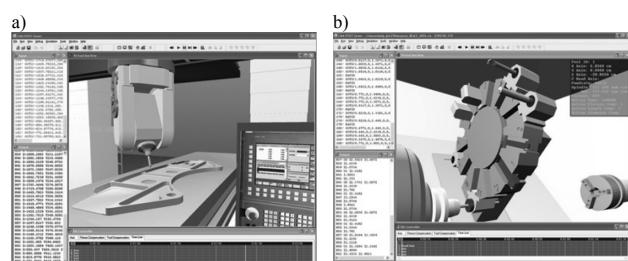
Screenshots of graphic machine tool simulations by using a ICAM Virtual Machine [12]: a) mill centre, b) dual spindle turn centre
